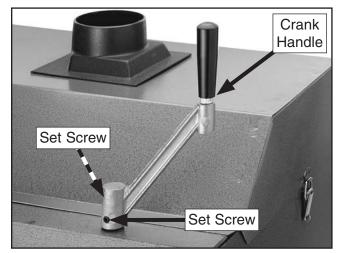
Crank handle attached to right front leadscrew shaft (G1066R shown).
